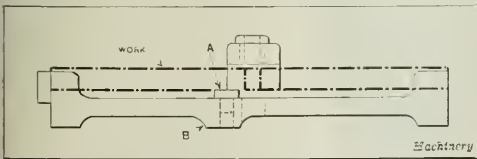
Drill Jig with Extra Foot located close to Drilling Point to prevent Distortion
